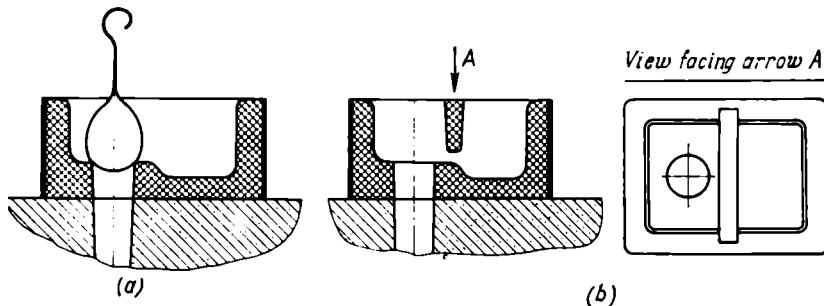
Pouring cups for running medium-sized castings (a) and large castings (b)
